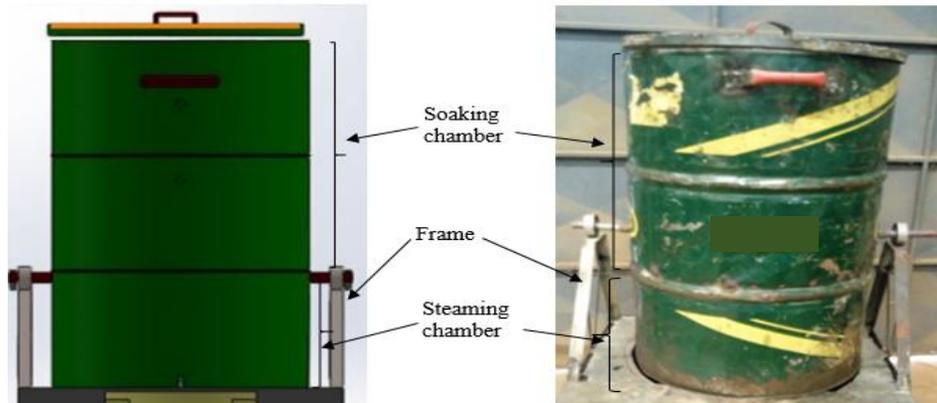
Mild steel drum parboiler showing the two chambers and the frame
